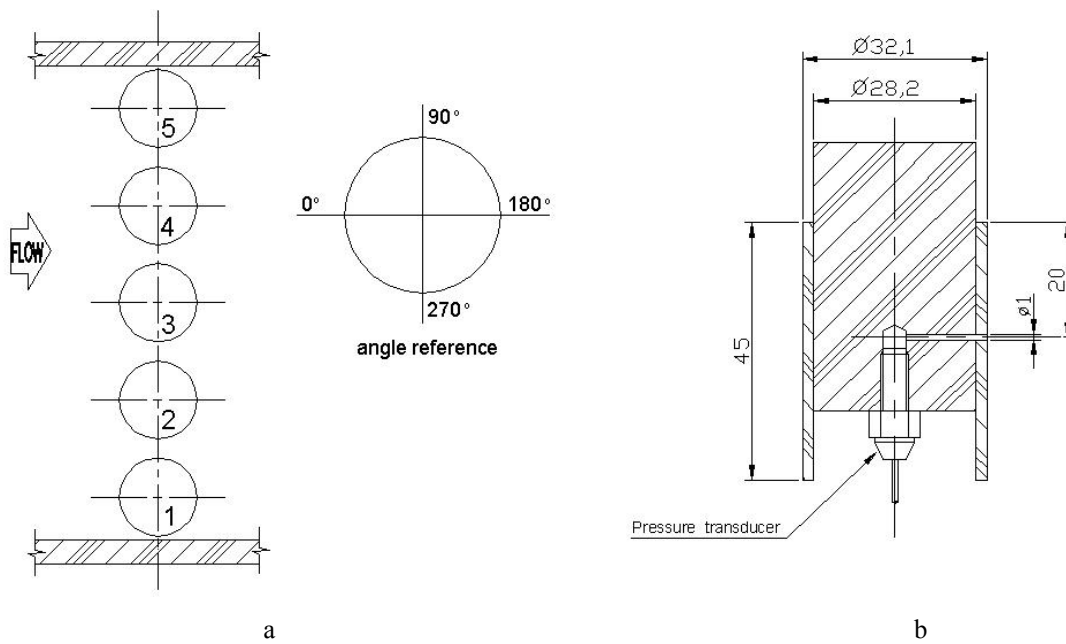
Mounting scheme a) tube row assembling; b) transducer support
